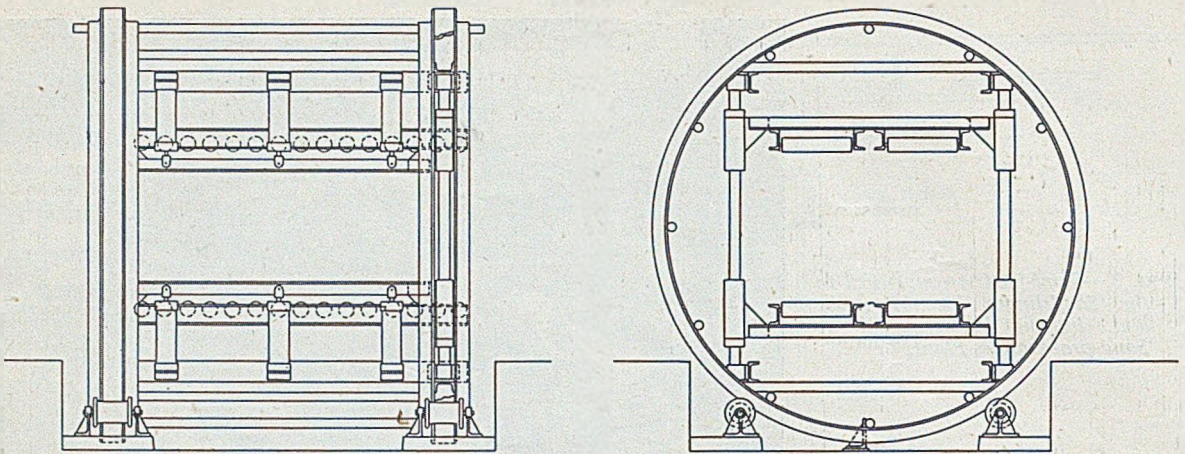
Elevation and Plan Views of the Mould-turnover Machine.
